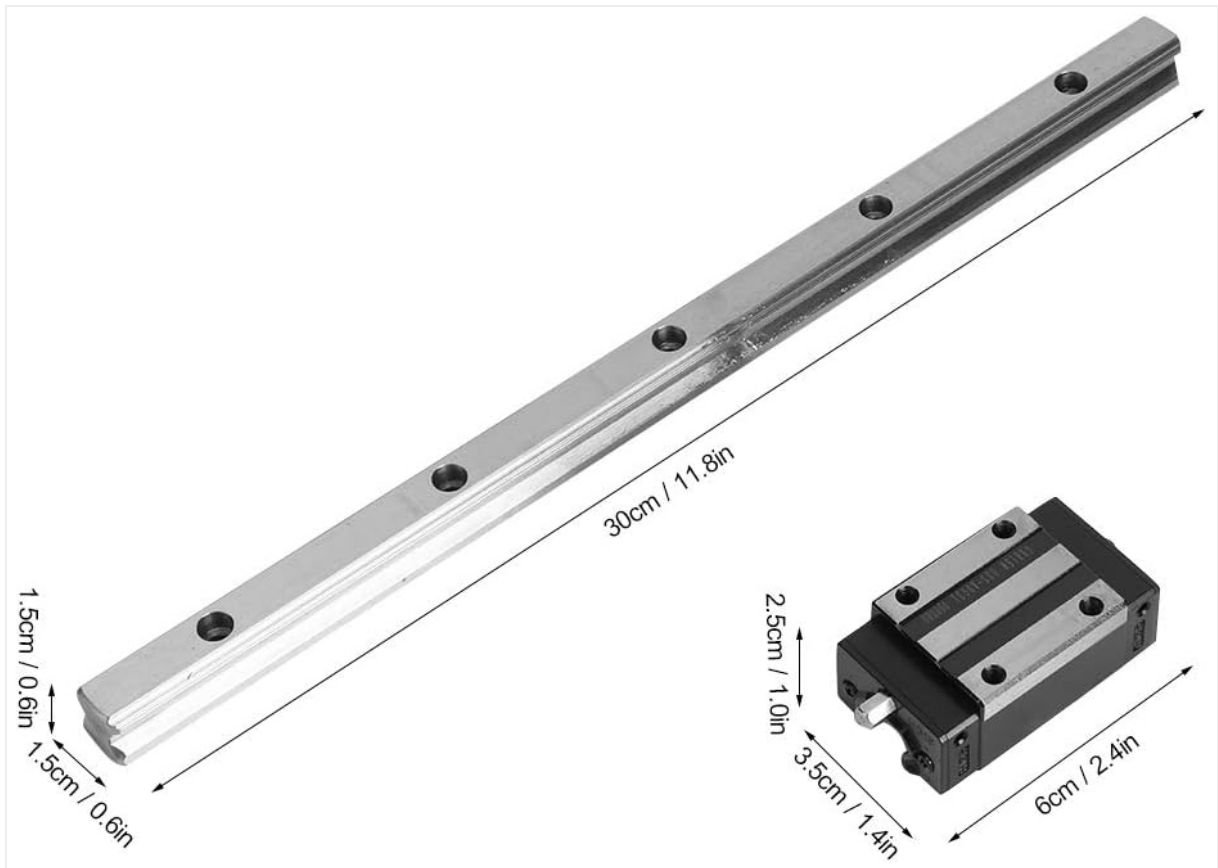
Dimensional drawing of the linear guide rail and a single slide block, indicating key measurements for reference.
